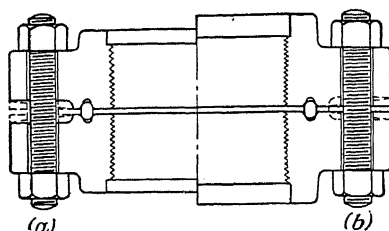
API standard ring-joint flange union: (a) flange for general or oil-field use when threaded with line-pipe thread; (b) flange for oil-field use when threaded with other than line-pipe thread and also for the 1½- to 2½-in. sizes of the 3000-lb cold-working pressure class when threaded for line-pipe thread.
